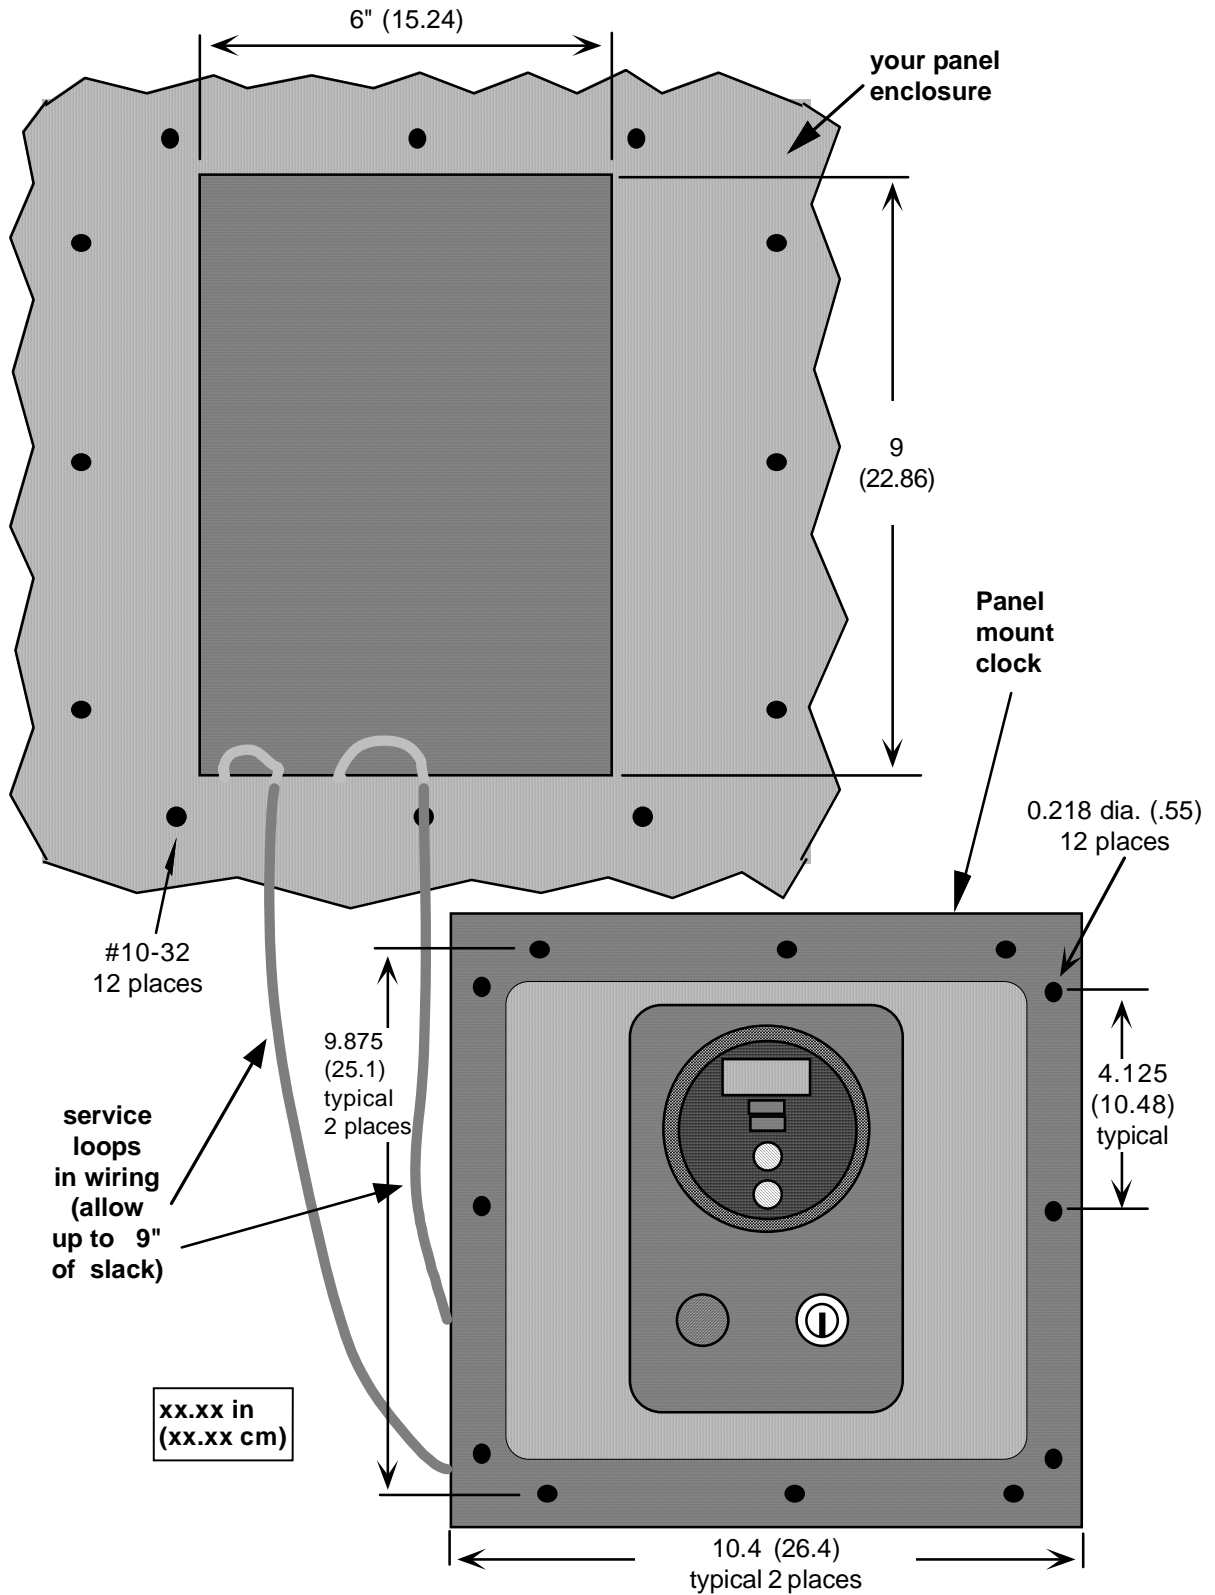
Panel mount clock mounting and cutout dimensions (allow $\pm 4"$ clearance)
